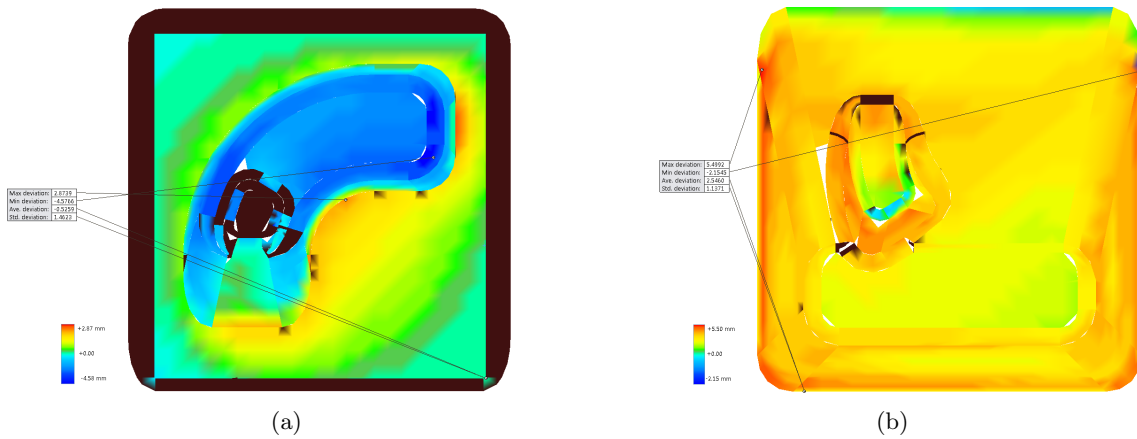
Rotomoulding sheet metal moulds dimensional measurement results: (a) lower side (b) upper side
